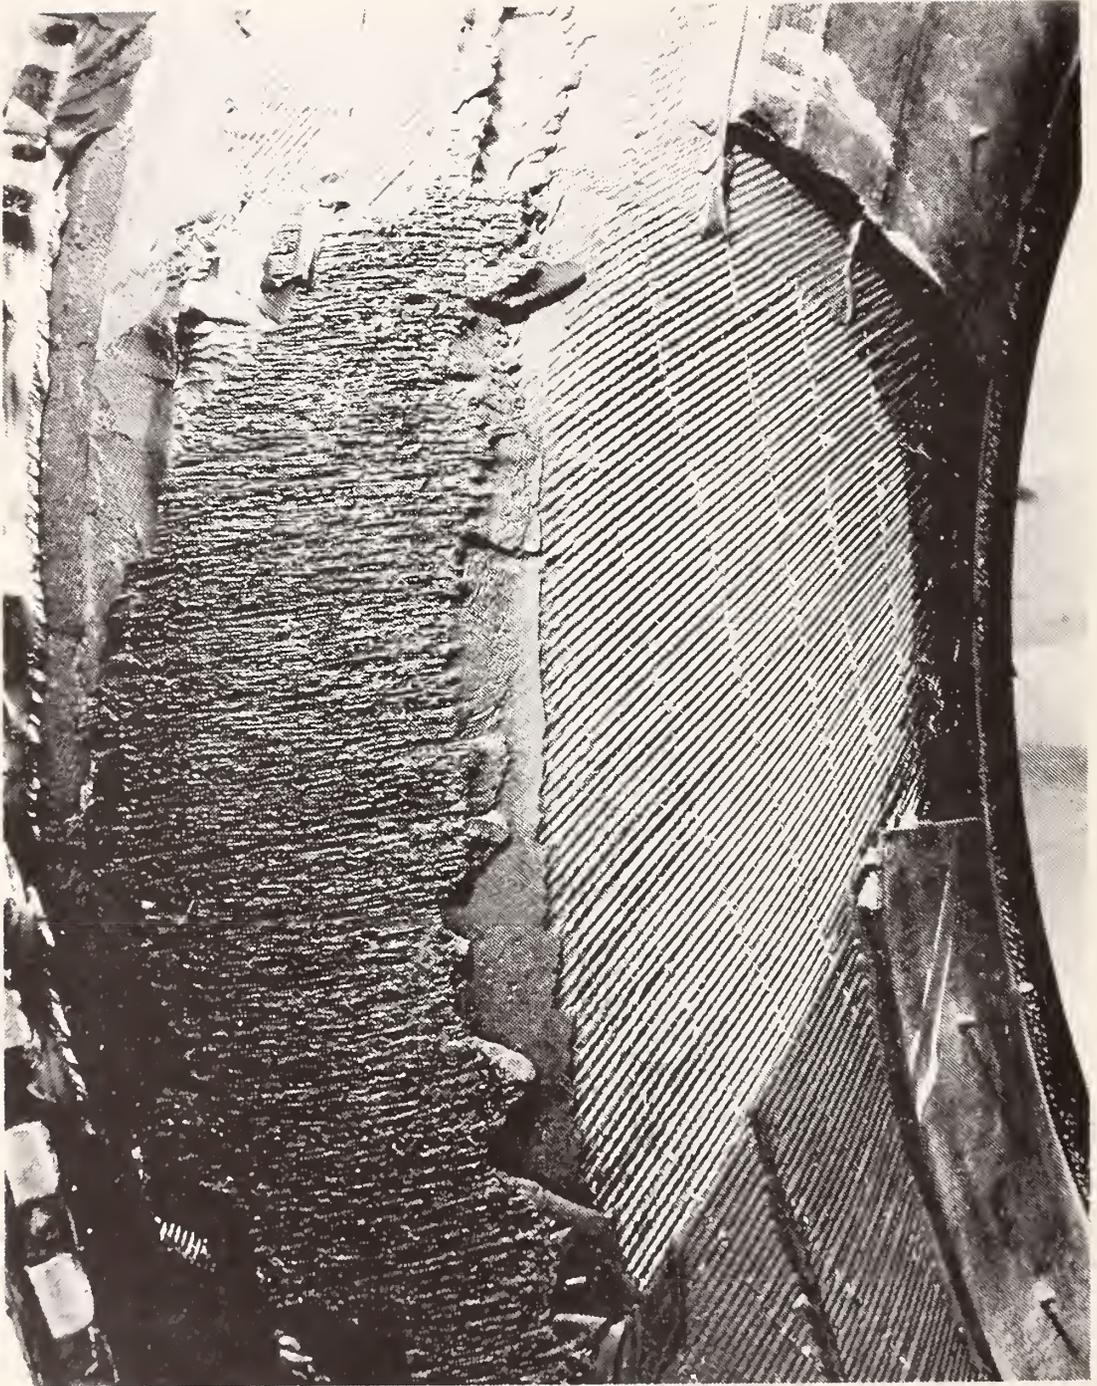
SIDEWALL SEPARATION AND AREA OF POOR RUBBER ADHESION T5X 1161
